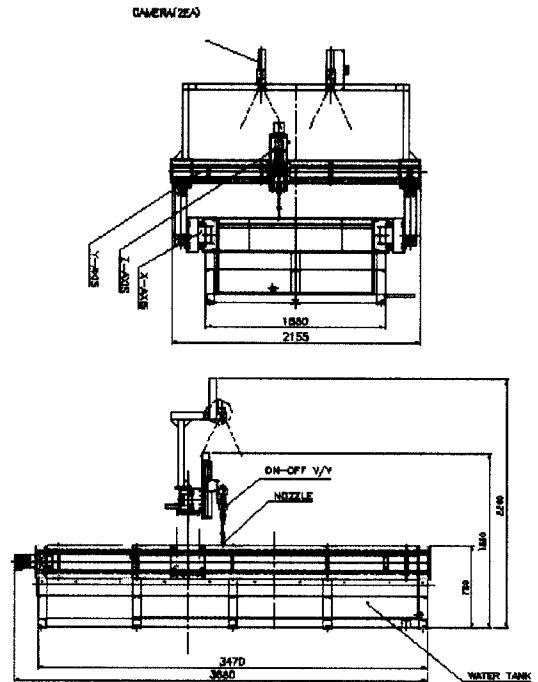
A drawing of abrasive-assisted water-jet cutting machine.
